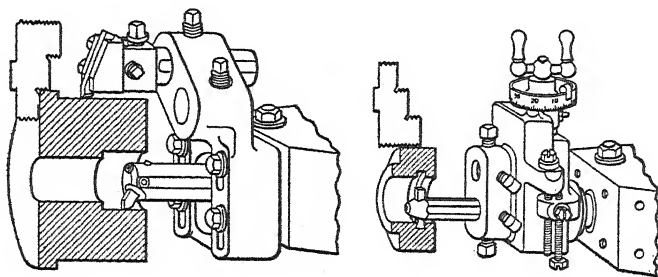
At the Left, Adjustable Multiple-Turning Head with Flange-Mounting on Turret, Showing the Adjustable Turning Toolholder and a Single-Point Boring Bar. At the Right, a Sliding Toolholder with Shank-Mounting in Turret for Recessing, Back-Facing, etc.
